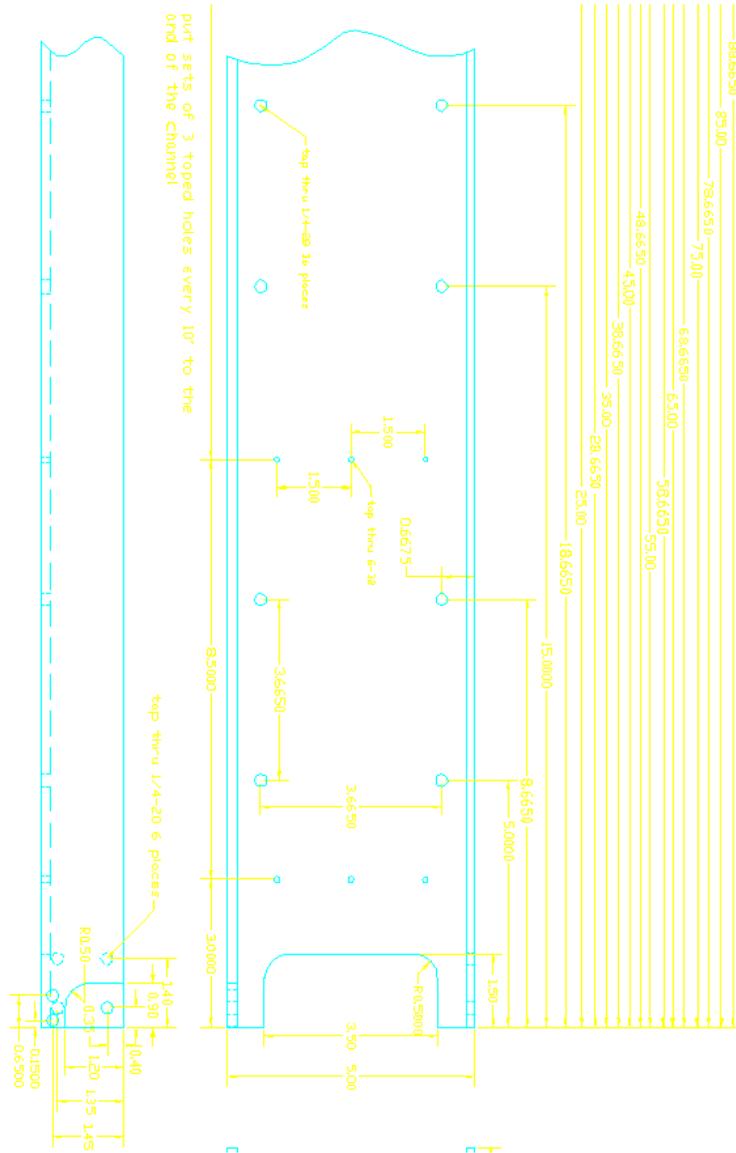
Detail view of right edge of channel in Figure 4, top and side views. This is the end to which the channel is bolted to the endplate with electrical feedthroughs. This end is referred to as the “B” end of the channel.
